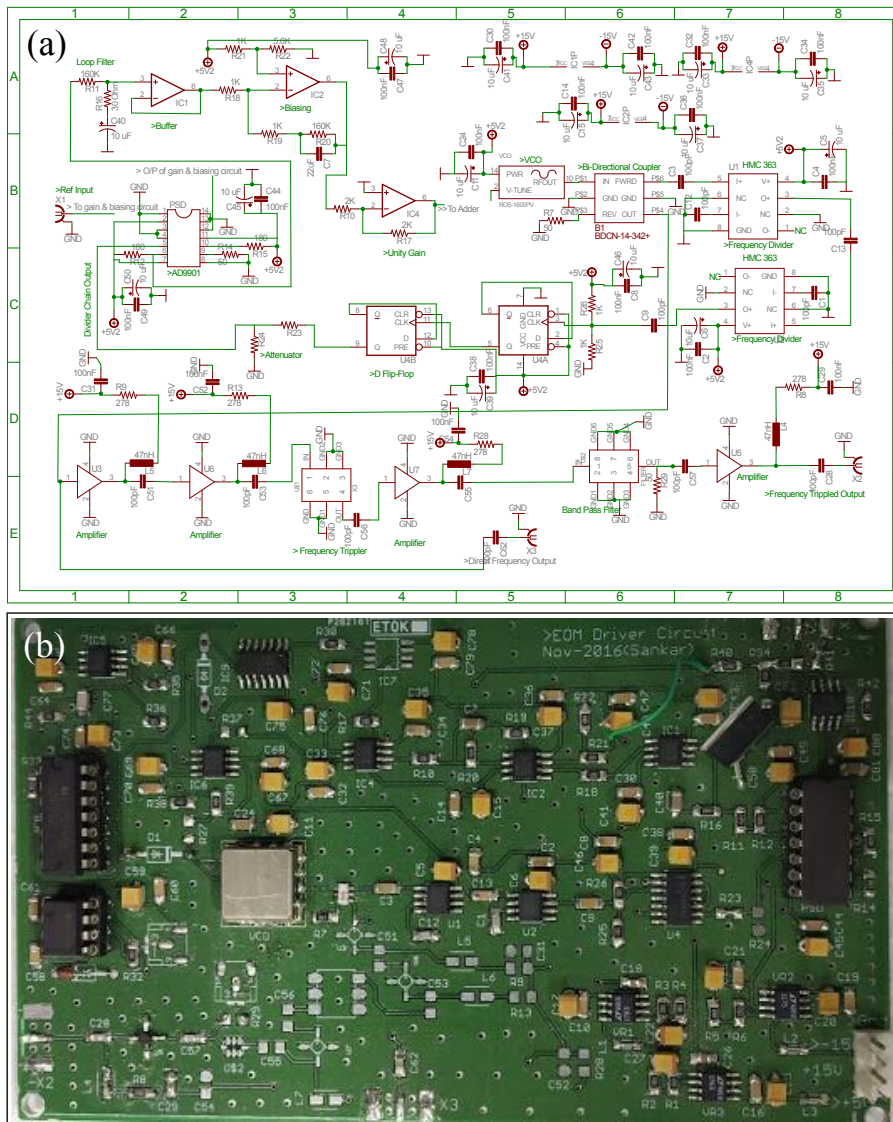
(a) Schematic and (b) populated PCB board for the EOM RF driver
